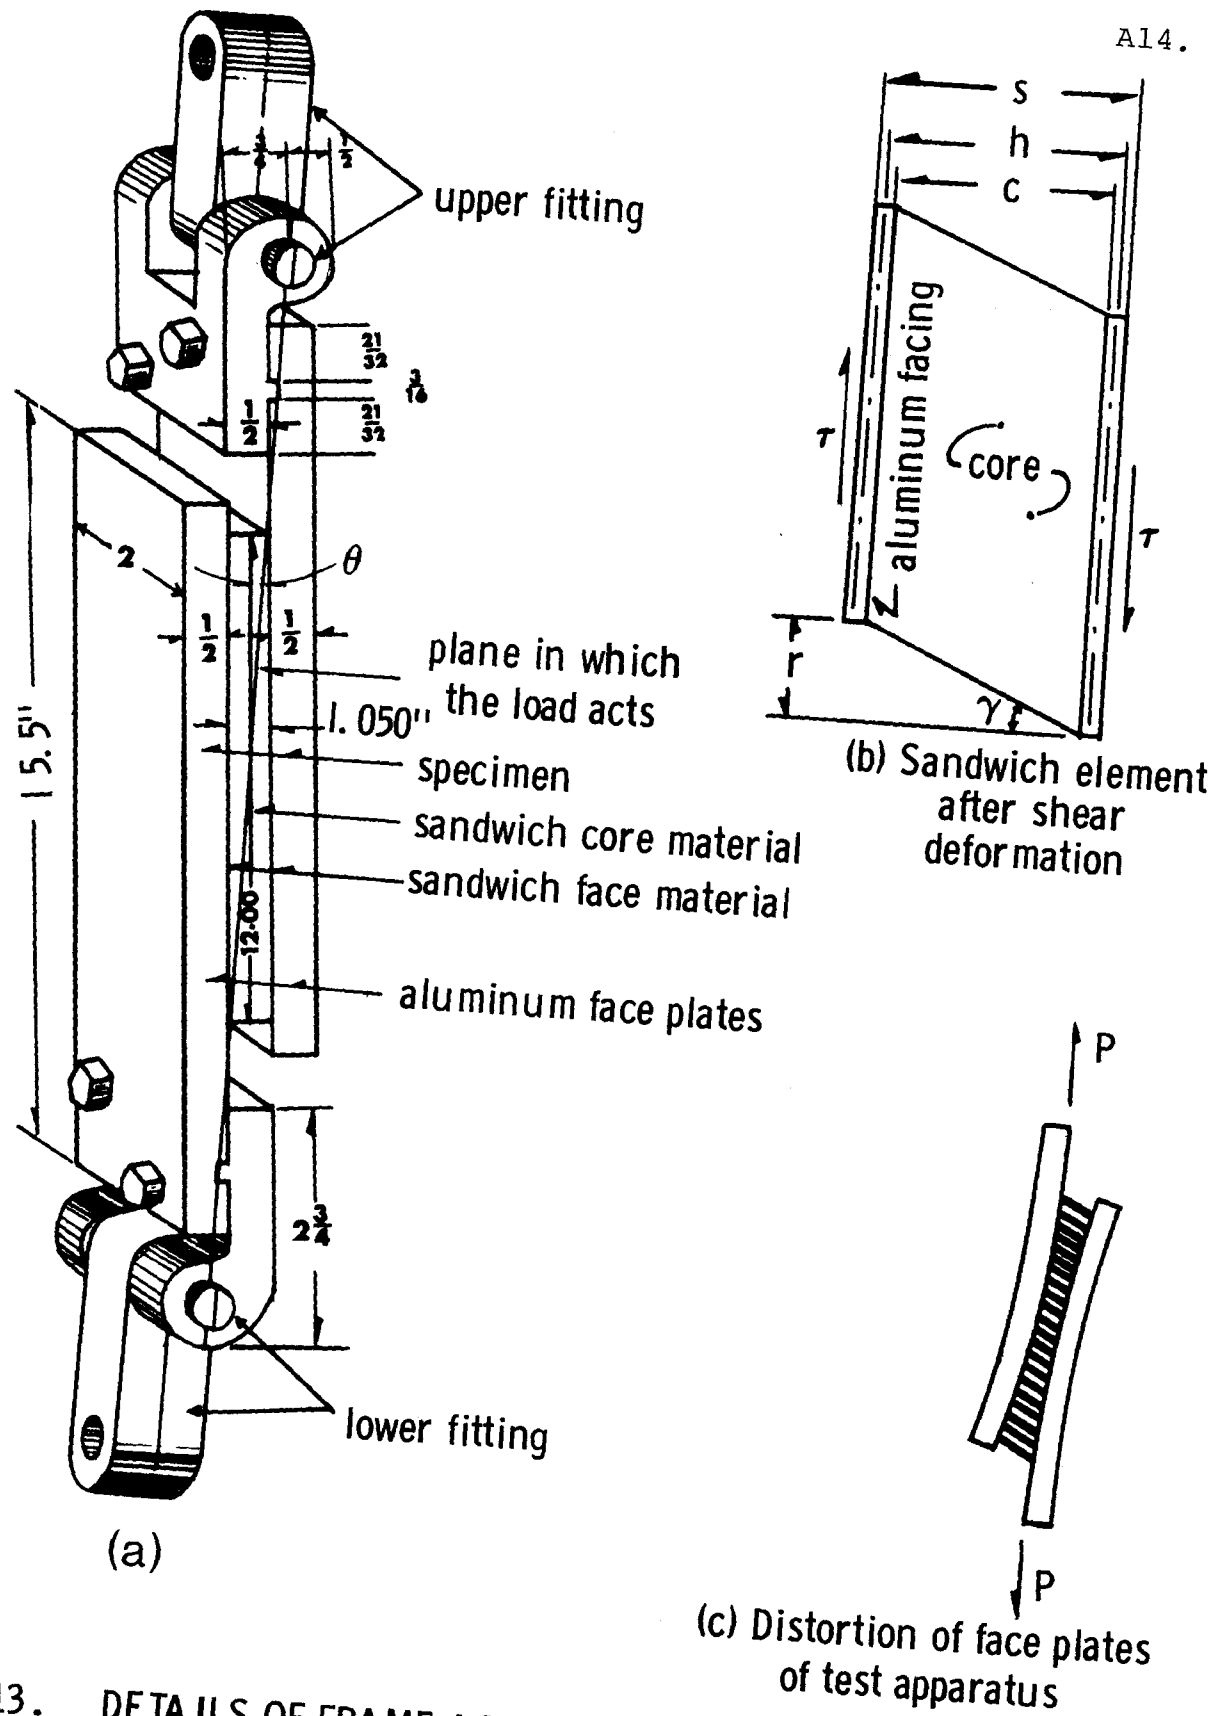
DETAILS OF FRAME ASSEMBLY USED TO TEST SANDWICH MATERIALS IN SHEAR
